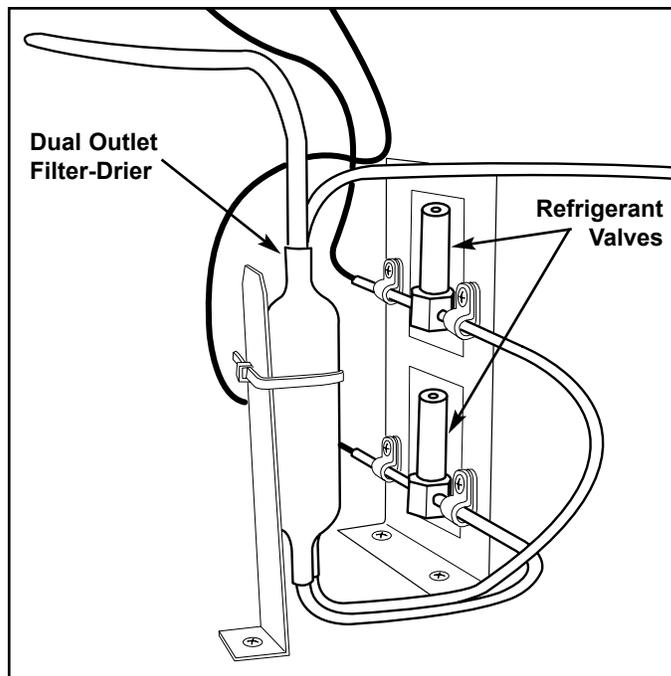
Capillary Tubes, Refrigerant Valves, Dual Outlet Filter-Drier
